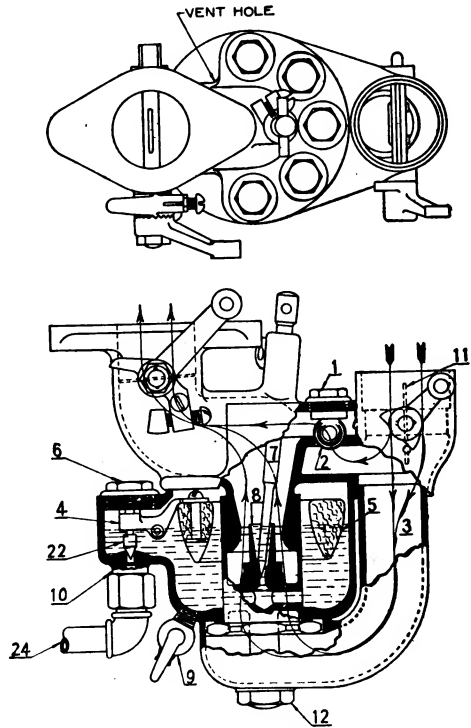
Plan and Section of Kingston Enclosed Carburetor
